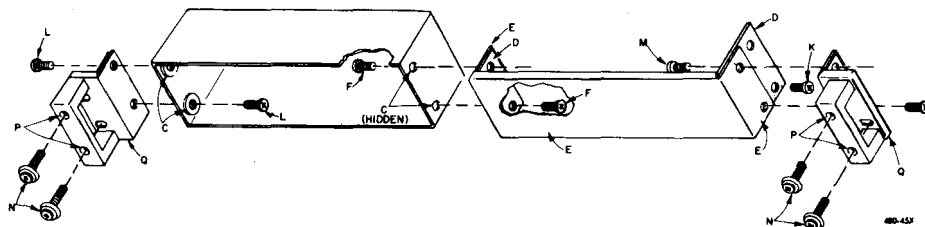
Method of mounting the Power Supply and a blank panel in a relay rack.
